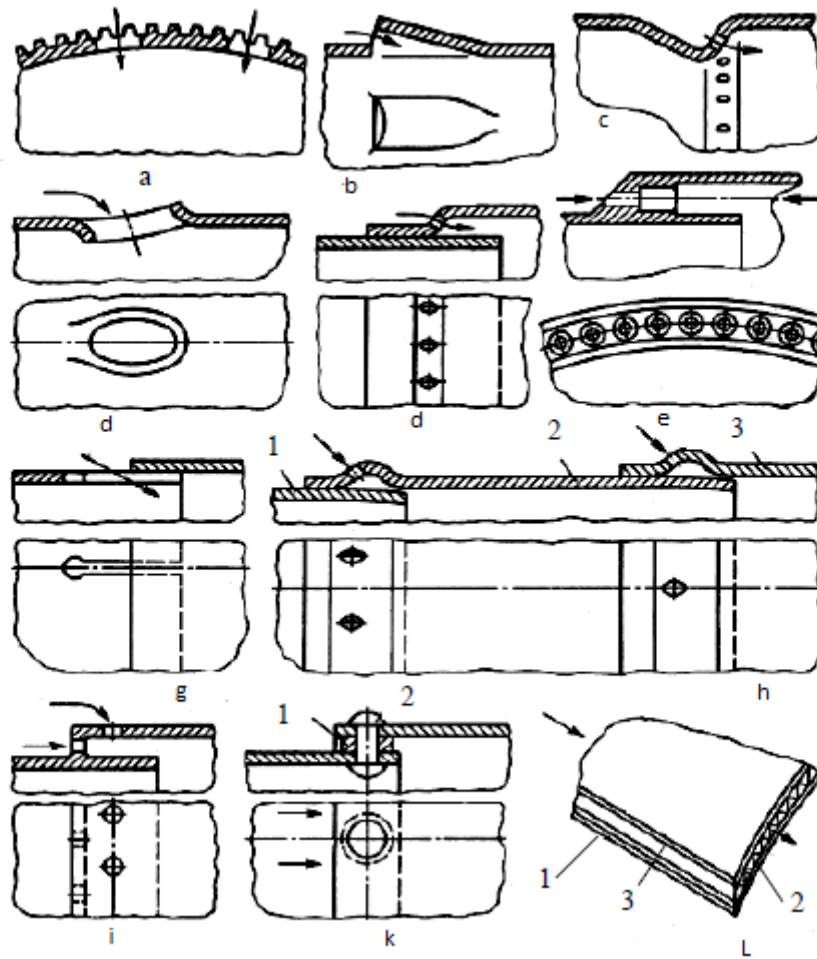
Elements of flame tubes: a - ribbed surface; b - slots; c, d - holes; d, h - holes and guide visors: 1,2,3 - sections of the heat pipes; e - holes for double expansion; g - slots; i - the formation of protective layer; κ - connection of sections with rivets: 1 - washer; 2 - rivet; L - honeycomb material: 1.3 - walls; 2 - corrugated filler
